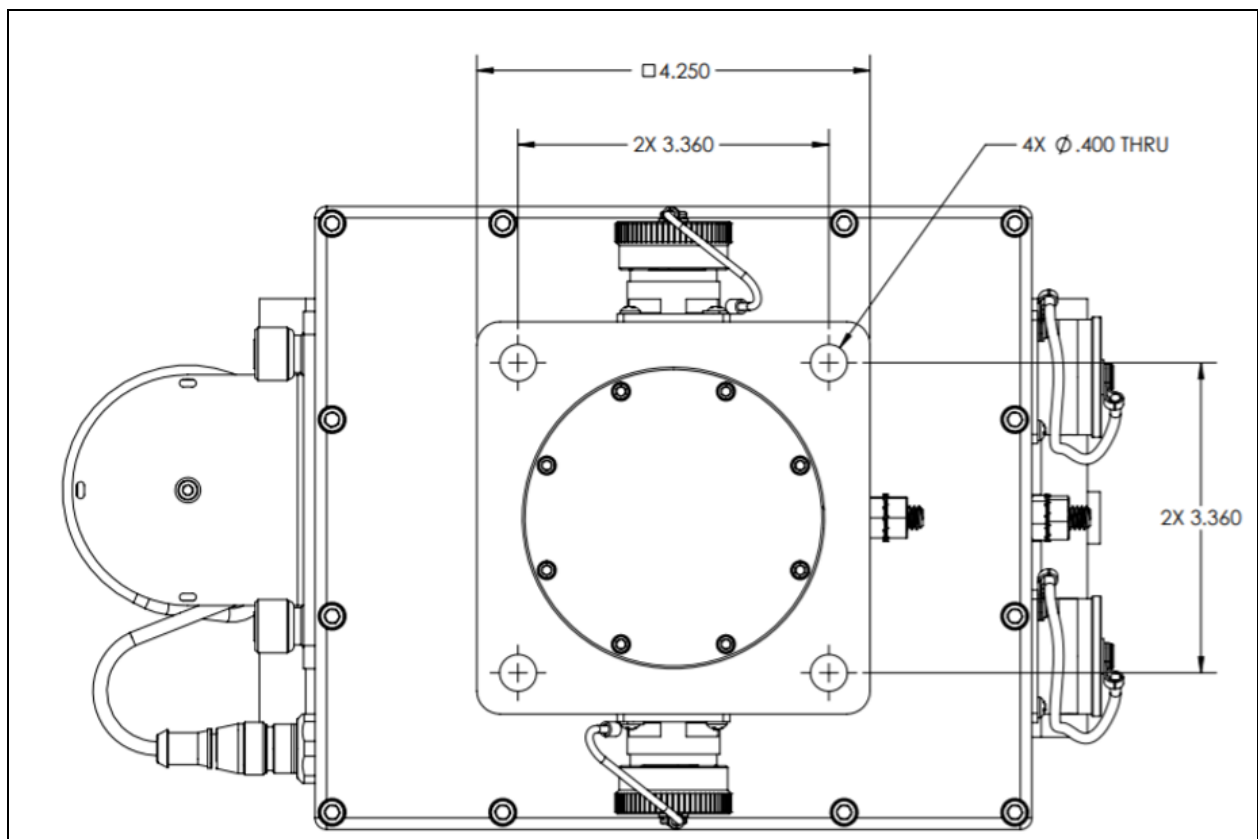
Bottom view of TD-90 with dimensioned hole pattern
